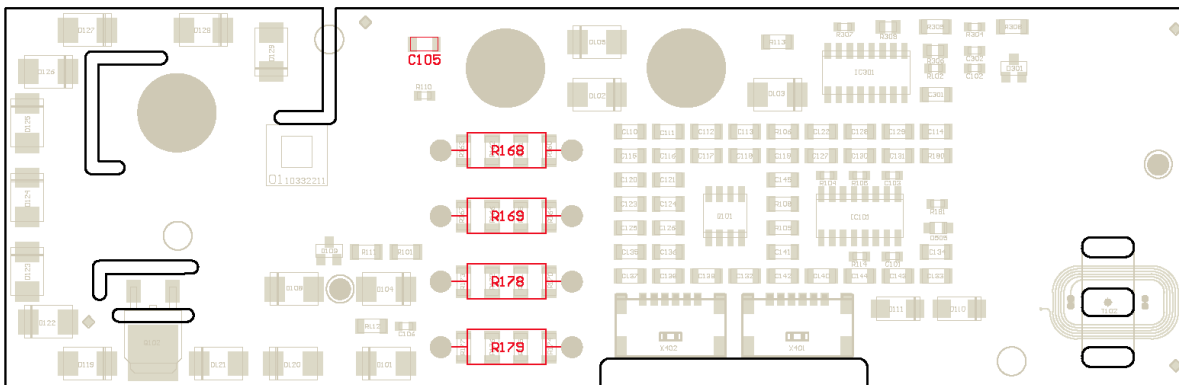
Assembly drawing of 1SP0635D2S1 with highlighted gate resistors
